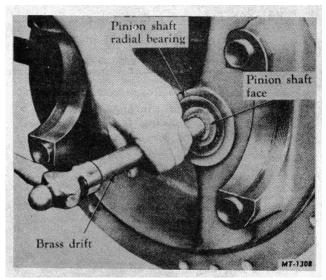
Starting Pinion and Cage Assembly from Carrier.
